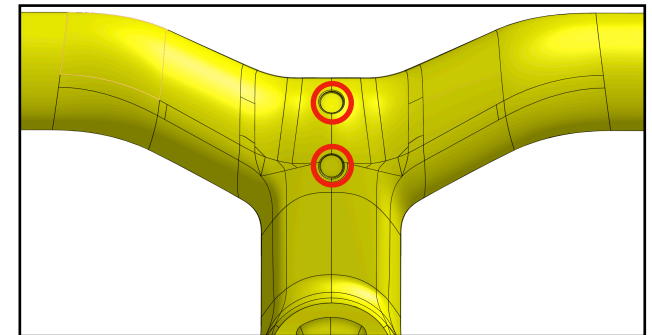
The two screw holes shown in red on the handlebars. These are located on the bottom of the handlebars.
